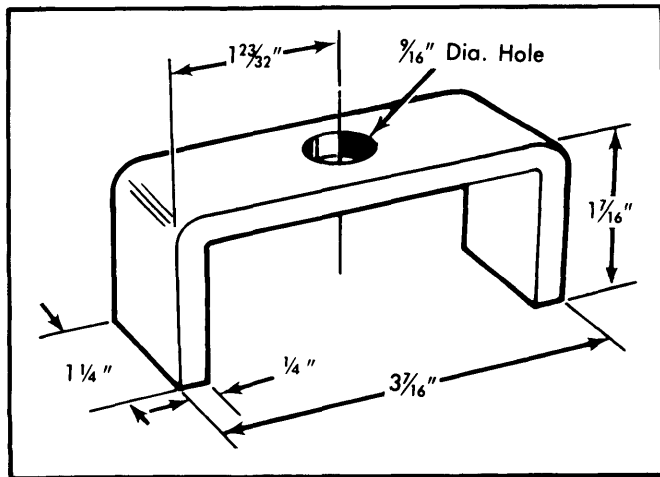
Dimensions for Making a Lock Plate Depressor Tool
